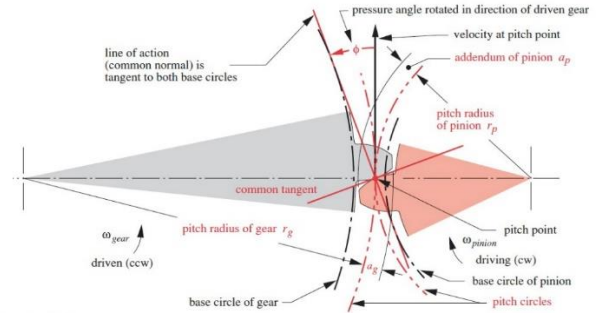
Contact Geometry and Pressure Angle of Involute Gear Teeth
